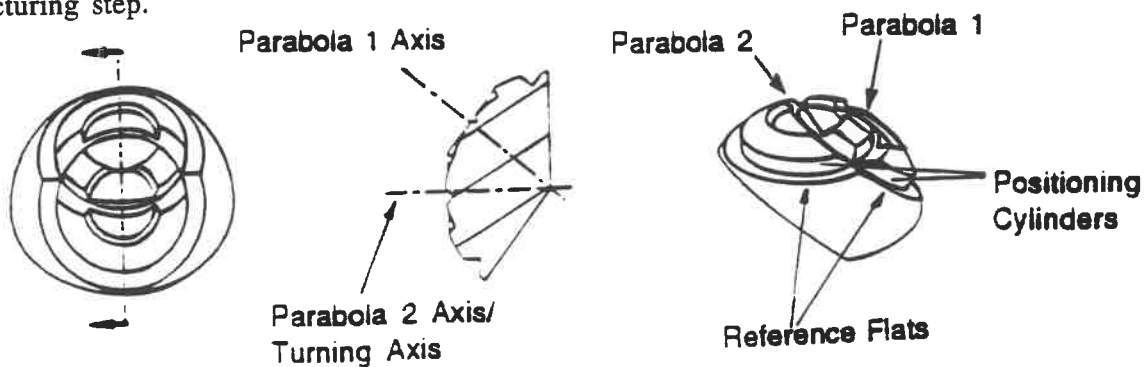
Spherical substrate after machining the second set of optical and mounting surfaces.
